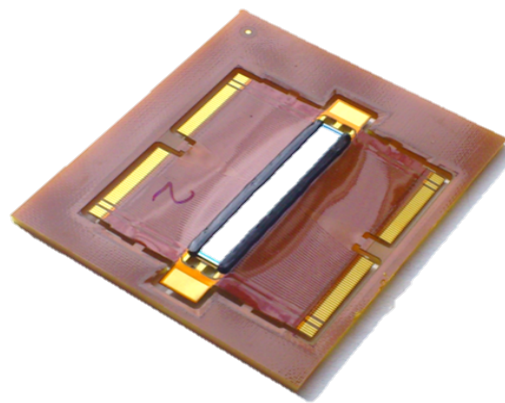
Flexible PCB for mounting CMUTs and connect to the probe handle PCB. A CMUT device is seen as the bright rectangle.
